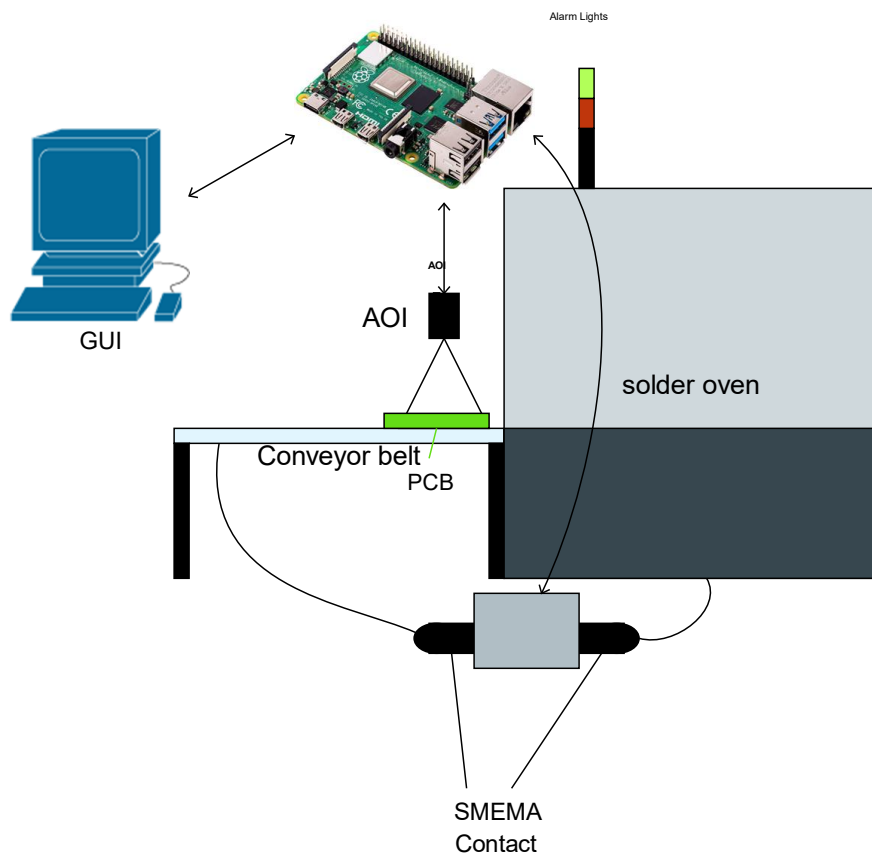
System sketch of the AOI, soldering machine and the conveyor belt for moving the PCB.
